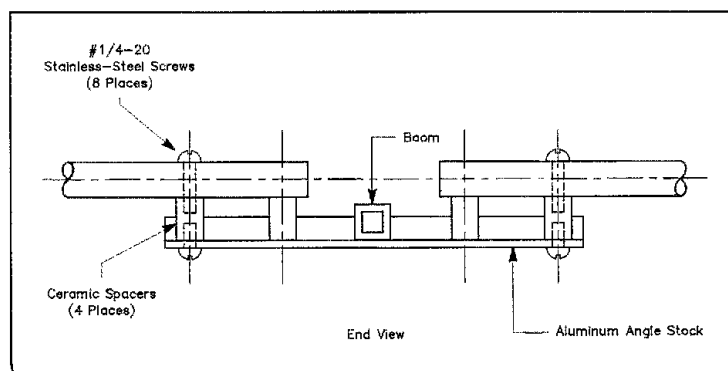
Element-to-boom mounting detail showing how ceramic insulators support the driven element on the angle stock. See Fig 4.
